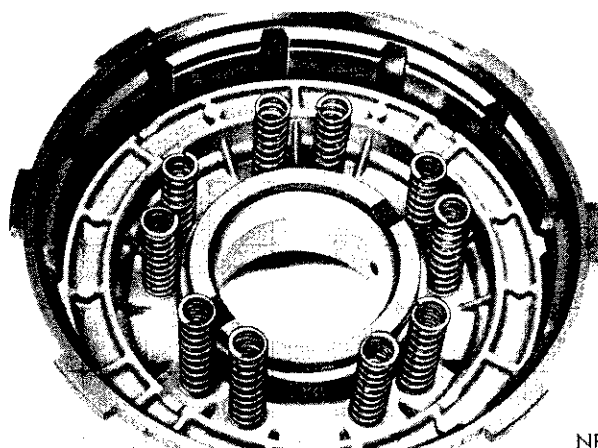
Replacing Front Clutch Retainer Bushing (A-727)
